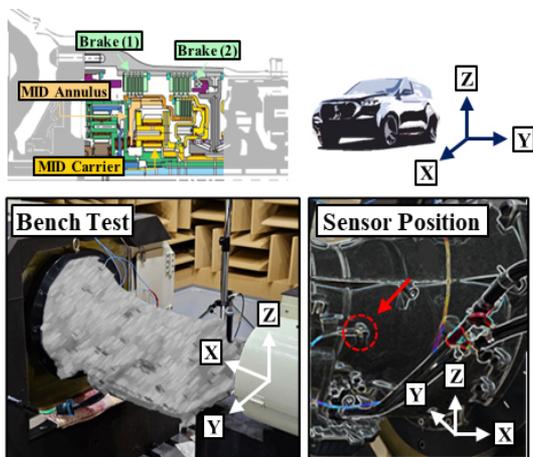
Cross-section view on FR type automatic transmission and test layout
